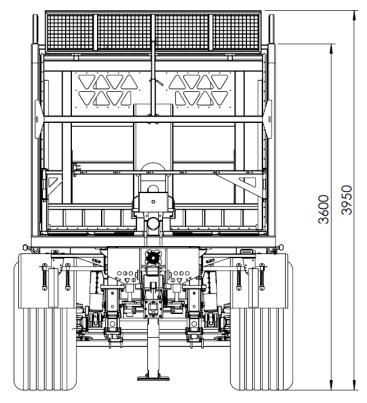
Basic dimensions (these dimensions may vary depending on equipment options)
